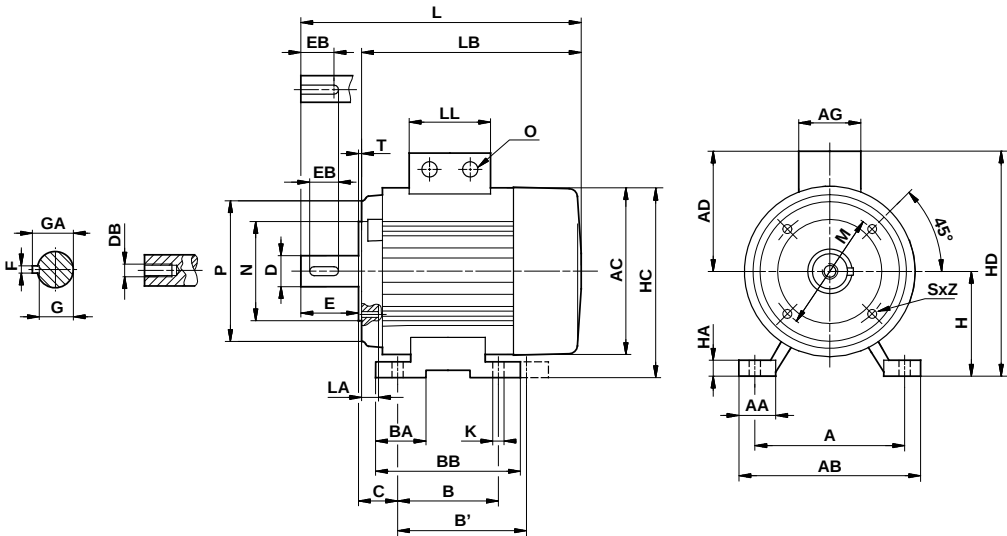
Foot-mounted motor with tapped-hole flange, IM B 34
